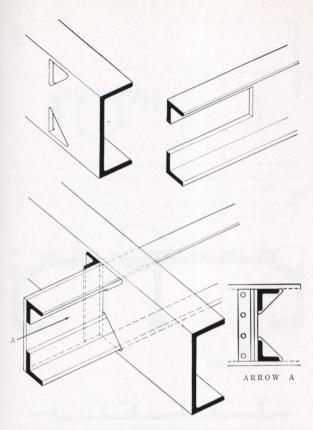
Intersecting extrusions can be joined by routing holes in one shape, permitting portions of the second shape to run through. Joint is then reinforced by backup plate and angle.
